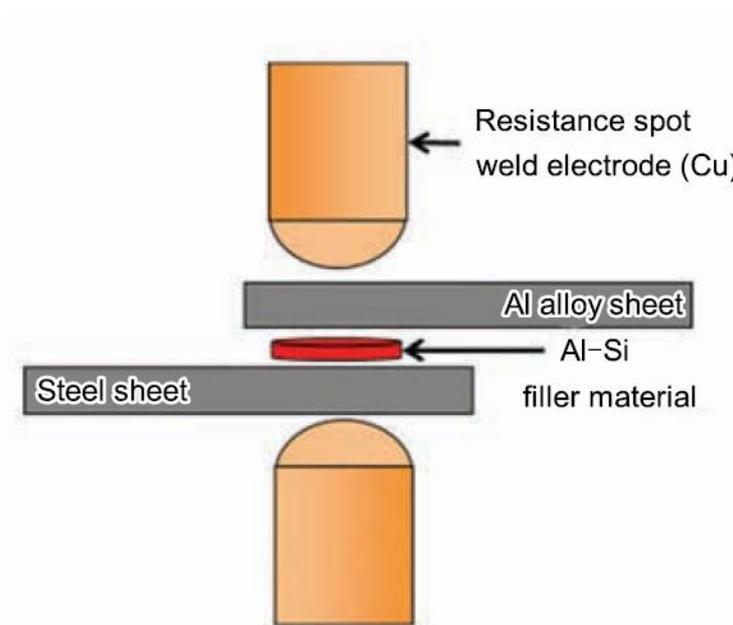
schematic drawing of specimen using filler metal for resistance spot brazing[27]
